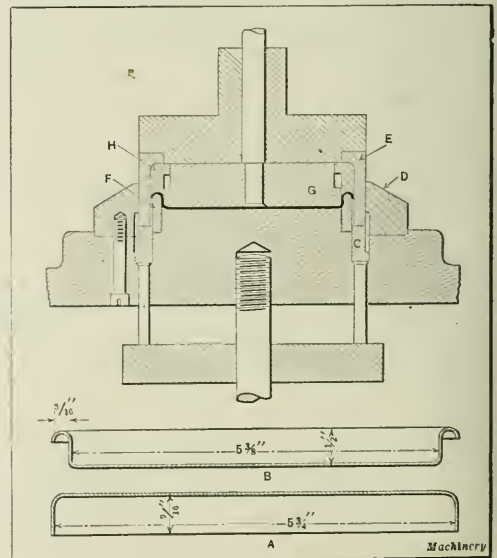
Another Combination Die which produces a Canister Cover by the Inverted Method of drawing
